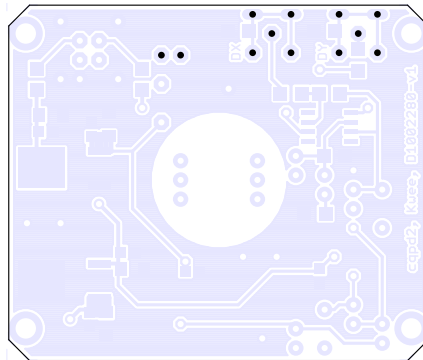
Board bottom view showing drills with 0.9 mm (0.035 in) diameter
